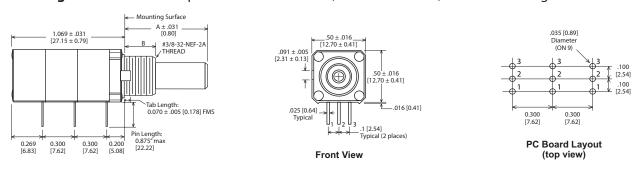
B22: B-22 Single Potentiometer or RS, PC Pin Terminals, 3/8" Dia. Bushing
